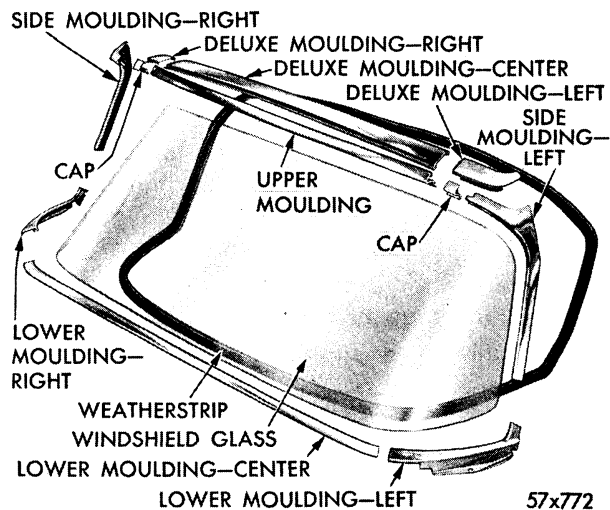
Windshield and Moulding Assembly (Chrysler Models)
